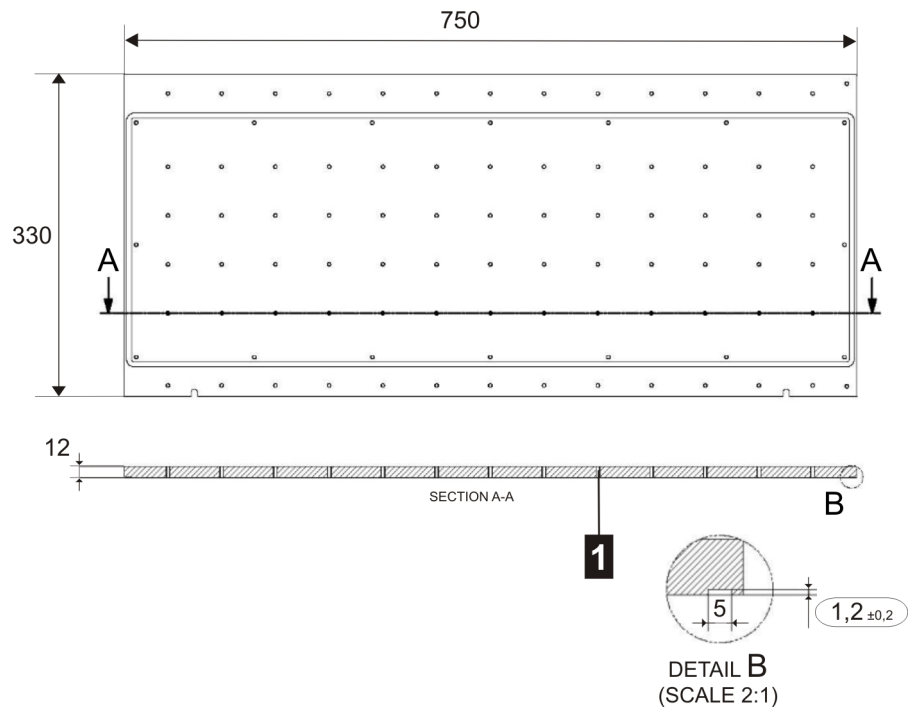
Dimensions of cooling plate D3-XM 300-080, dimensions in mm
